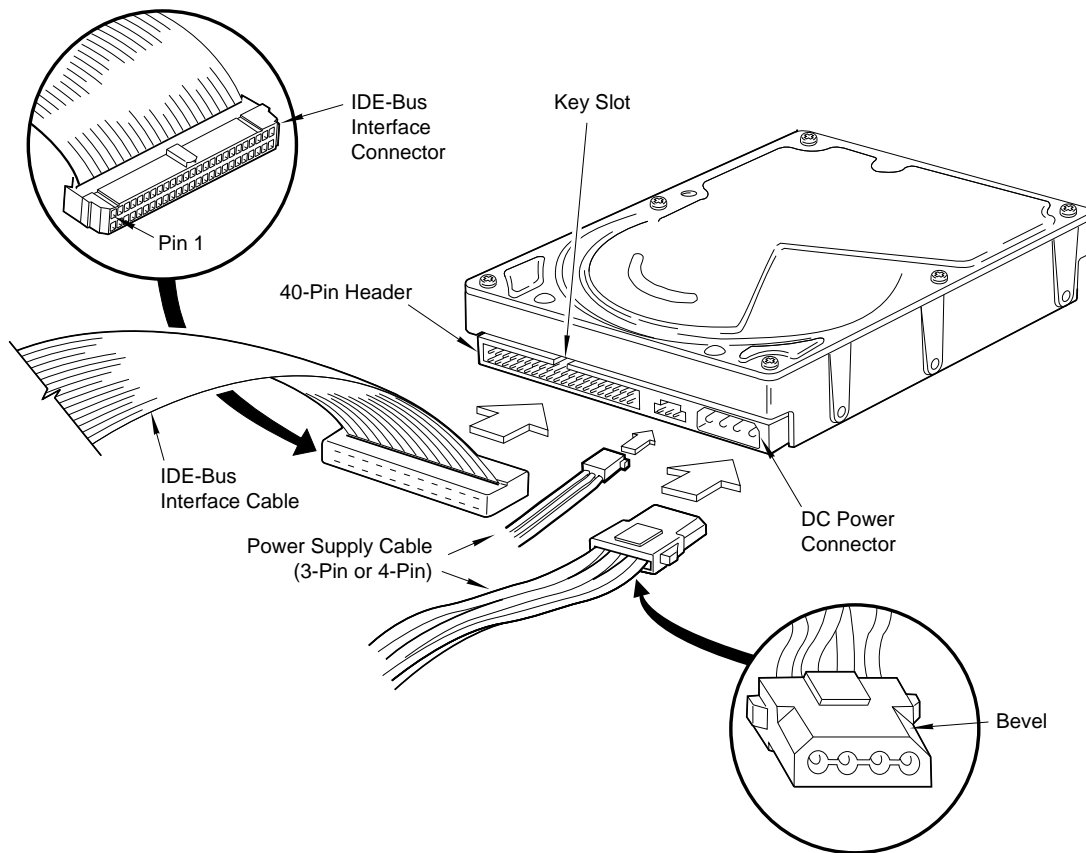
Drive Power Supply and IDE Bus Interface Cables
